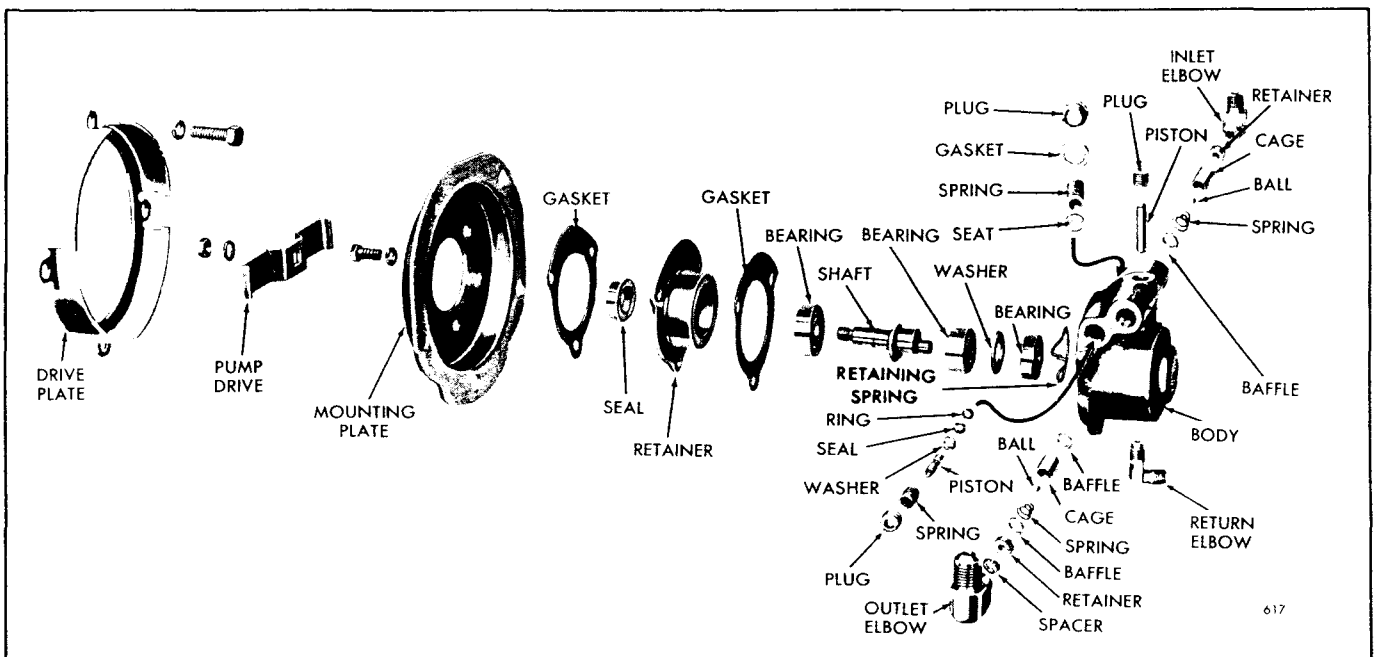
Direct Engine-Driven Charging Pump Details and Relative Location of Parts
